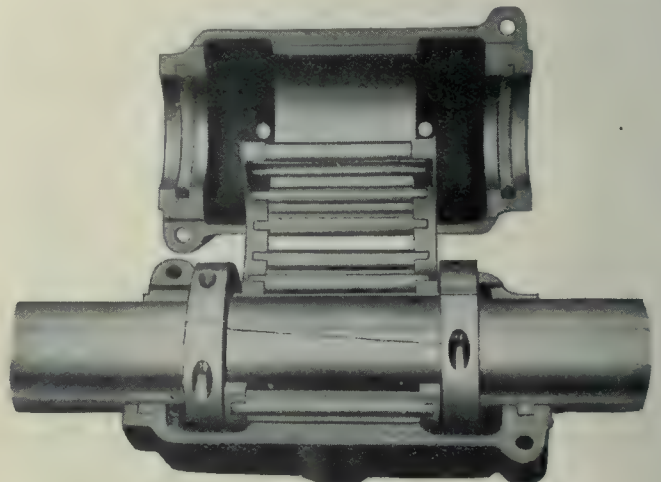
Sells Roller Bearing of Single Cage Type.
